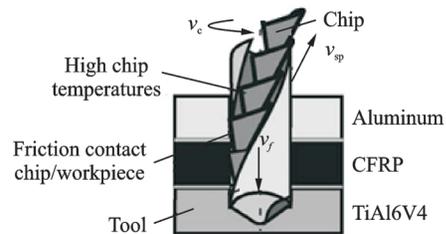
Chip removal problems in drilling FRP/metal stacks^[22]
